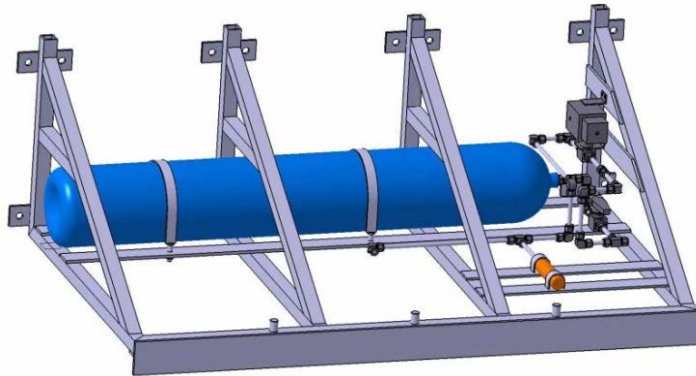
Technical Drawing of the Open Water Test Setup
